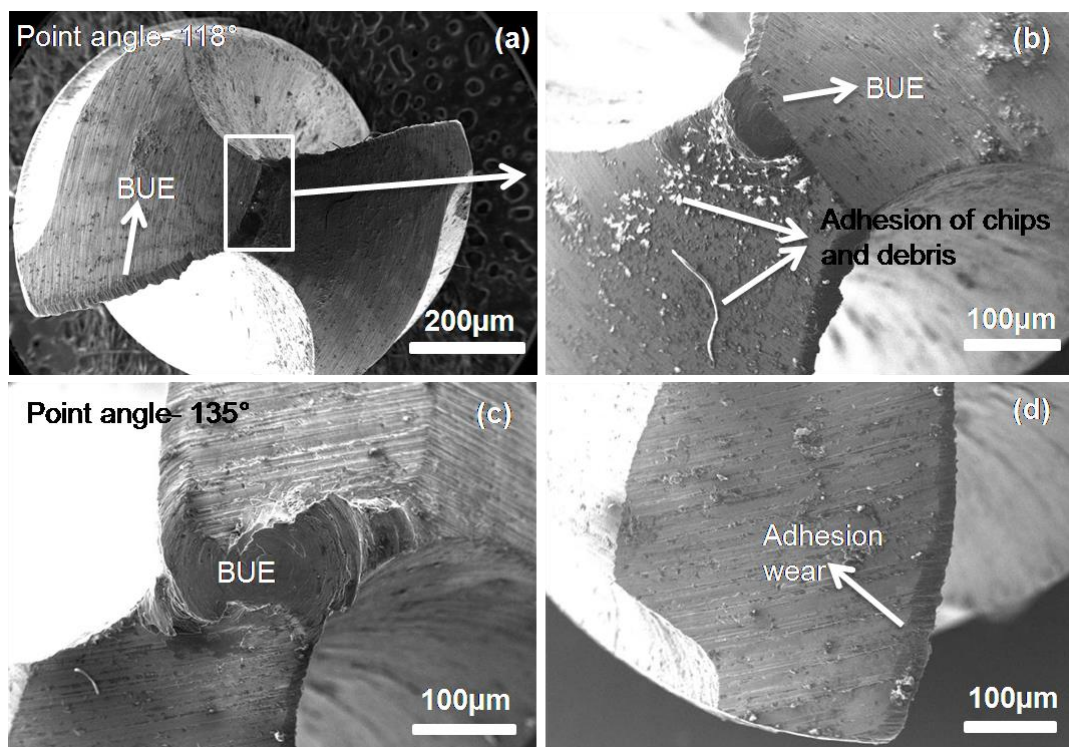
23 SEM images of 118° and 135° point angle tools (a) BUE, (b) adhesion of chips on flank space in 118° point angle drill bit, (c) BUE formation on chisel edge of 135° point angle tool, and (d) adhesion wear on 135° point angle tool.
